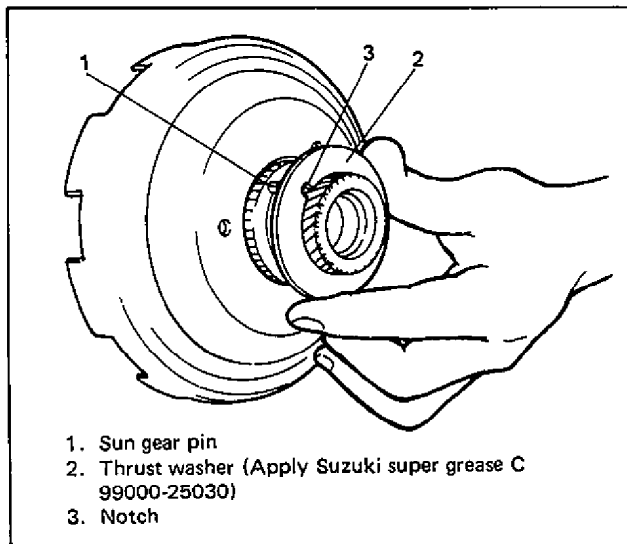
B-201 Installing Sun Gear Pin and Thrust Washer
